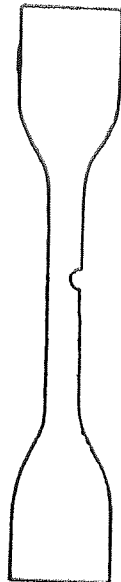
Crack developing in the edge of a test-piece during a fatigue test.
